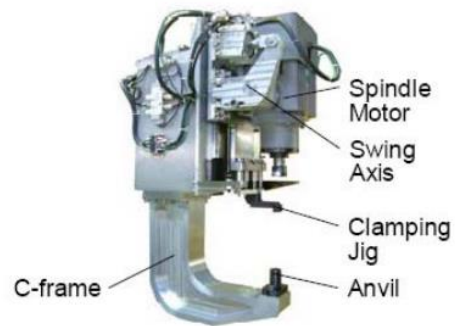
Prototype swing FSSW gun “Swing-Stir”
